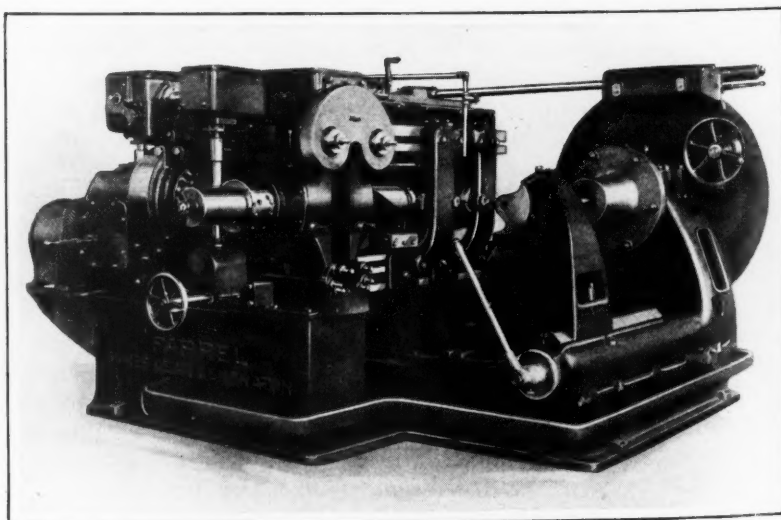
Sykes Gear Generator for Cutting Gears from 1 to 49 Inches Outside Diameter
